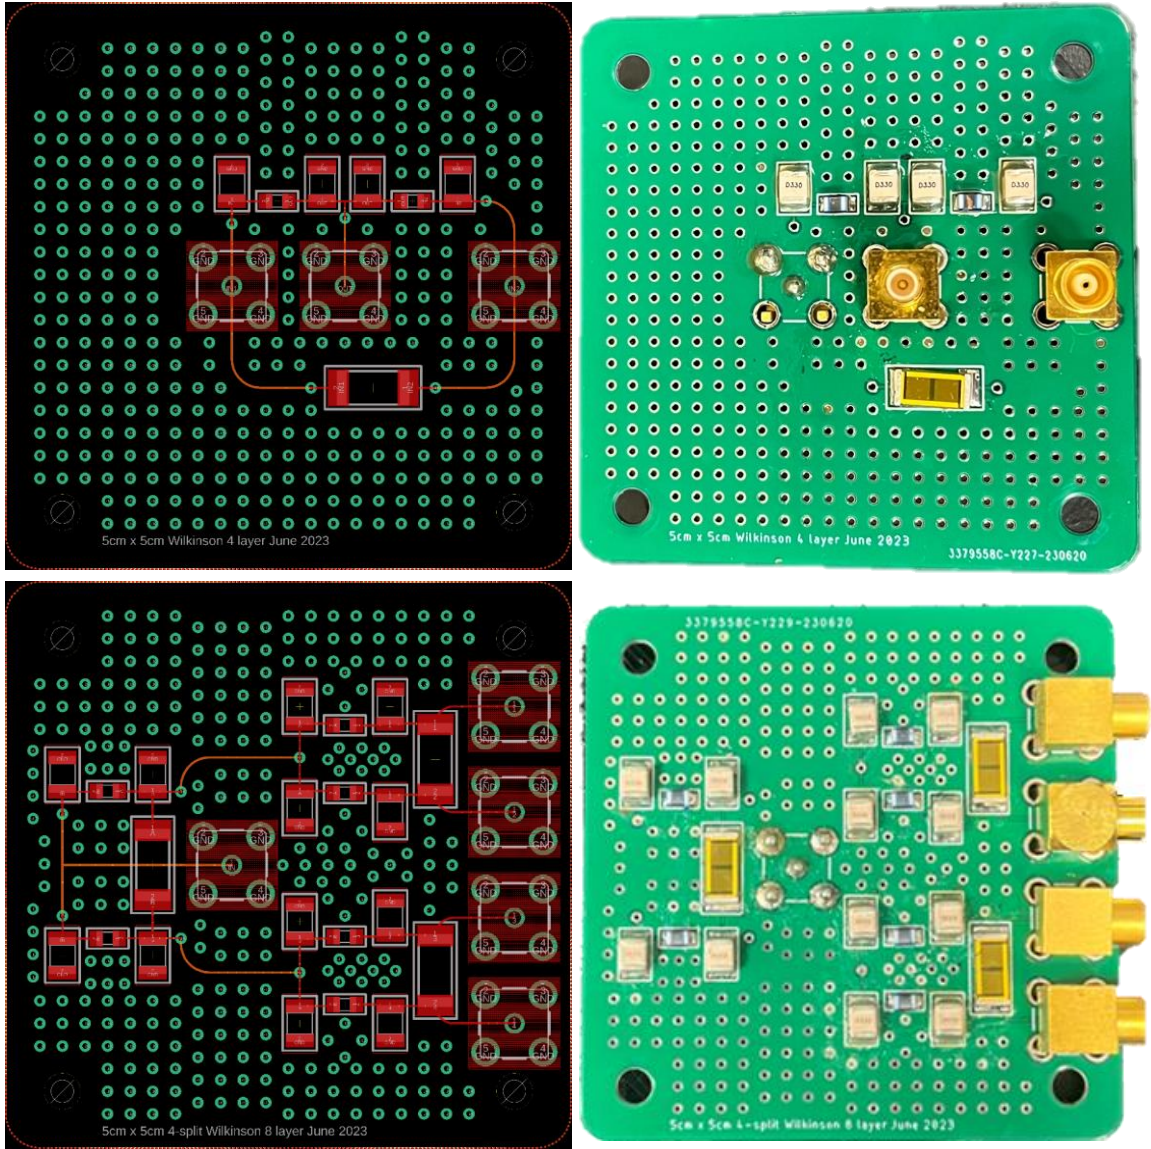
Circuit layout and PCBA for Wilkinson power combiners
